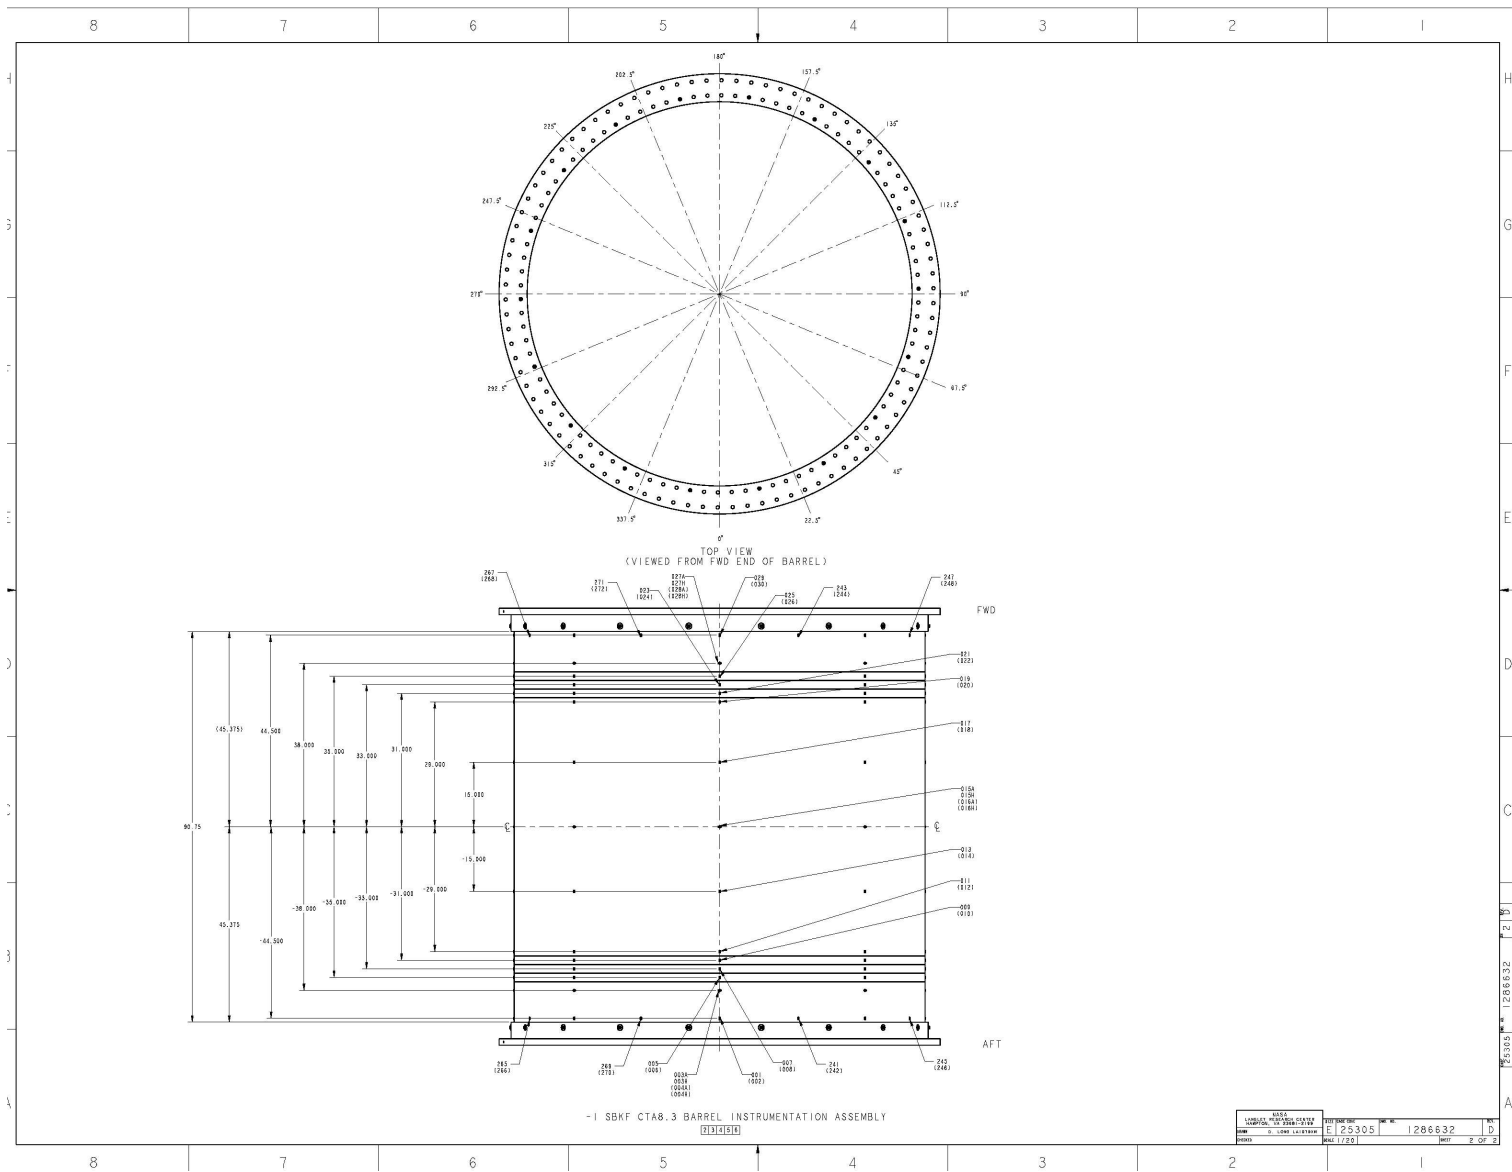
Strain-gage instrumentation drawing, LaRC Drawing 1286632 RevD (concluded).
